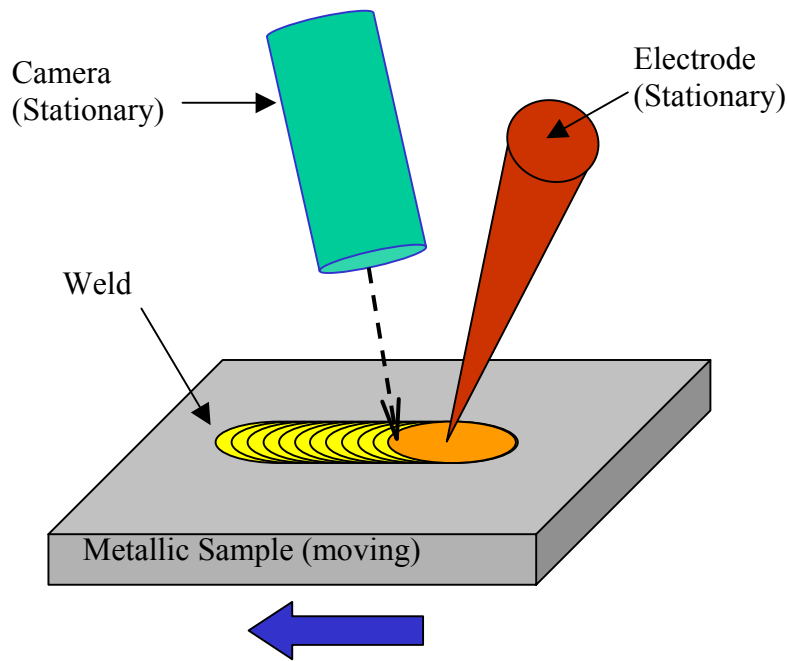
Schematic showing the arrangement of the camera, sample, and welding torch.
